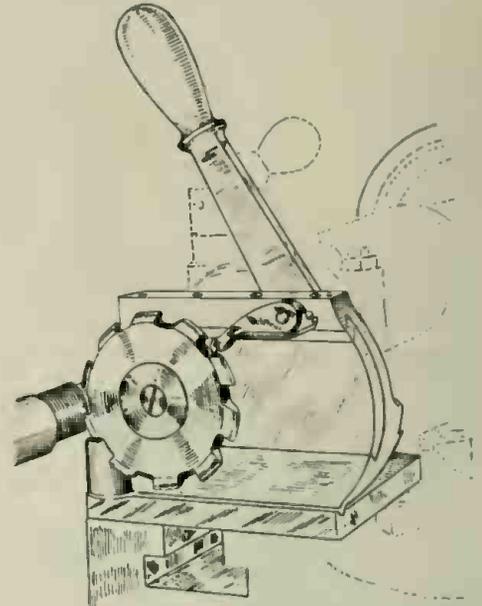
Appearance of Universal Thread-Cutting Tool Which Carries a Cutting Head Provided With Various Sized Teeth for Cutting Small, Medium and Large Threads. Any Individual Tooth May Be Reground Until Entirely Used Up, Without Changing Its Shape. The Lever Locks the Cutter in Any Desired Position.
